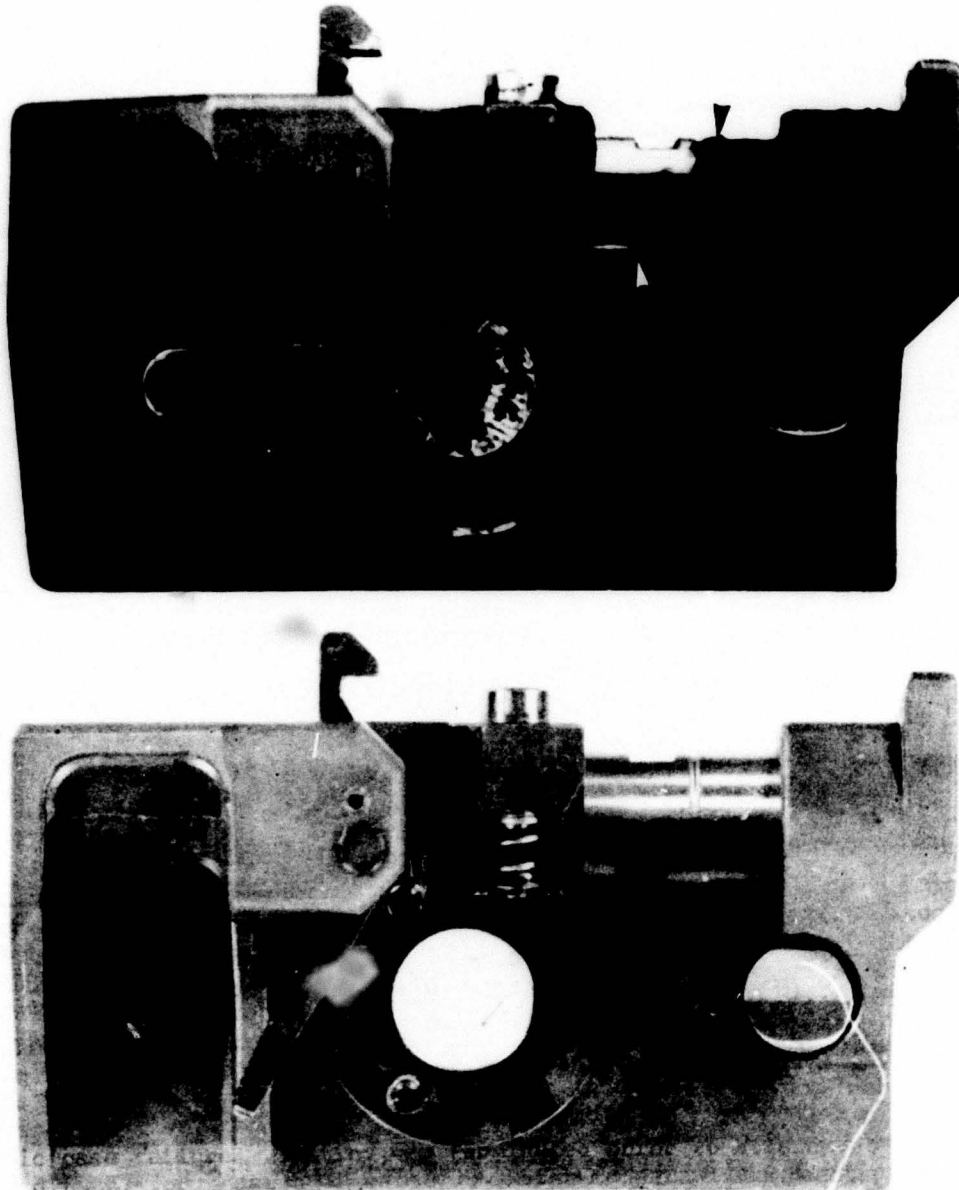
Residual Fouling Deposits on Rear of Feeder Assembly (Arrows) of the 5.56-MM HK-23A1 Machine Gun (TOP), after 1295 Rounds of Firing. Clean Feeder Assembly Is Shown at Bottom for Comparison.
